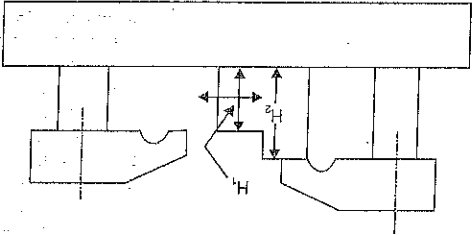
An Inspection Fixture with Rigidly Fixed Limit Elements.
